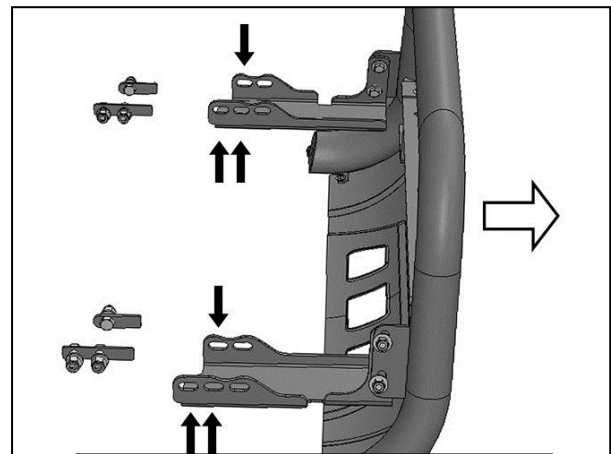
Outer driver side Bracket with Single Bolt Plate
